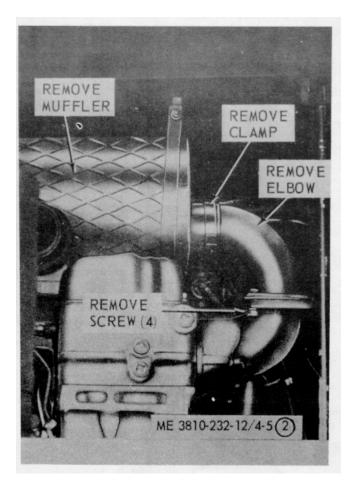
Crane engine exhaust assembly, intake and exhaust manifolds, removal and installation.
